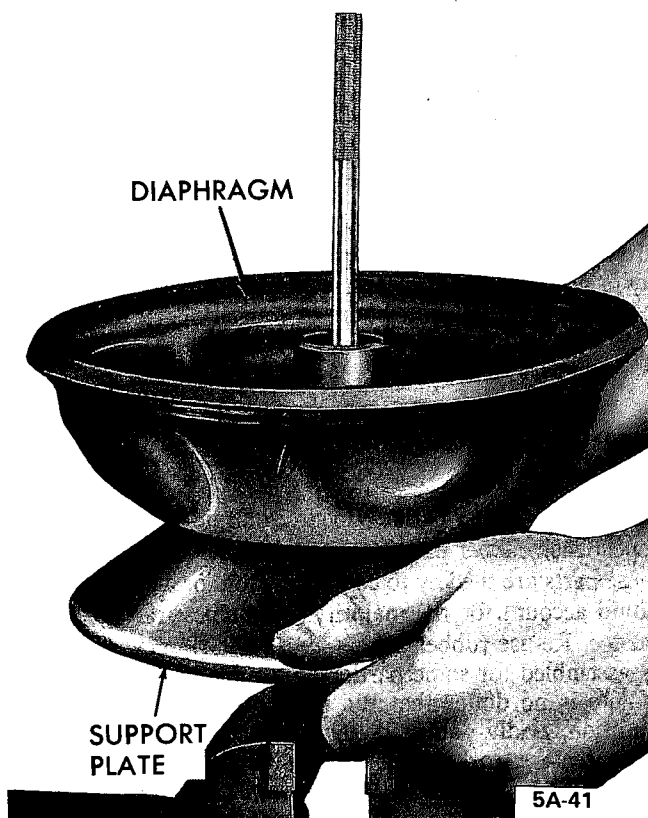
A-41 Positioning Power Piston on Support Plate Remover
